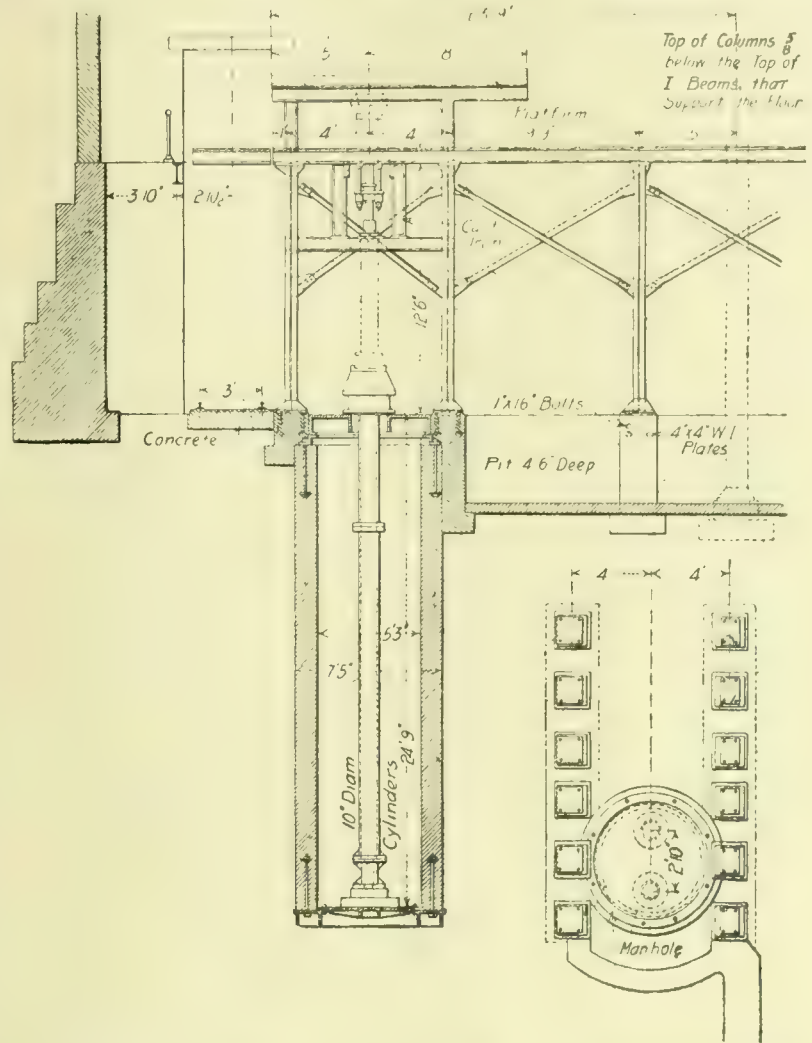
SECTIONAL ELEVATION AND PLAN AT END OF PIT, SHOWING LOCATION OF PIPE-MOULDING MACHINE.
